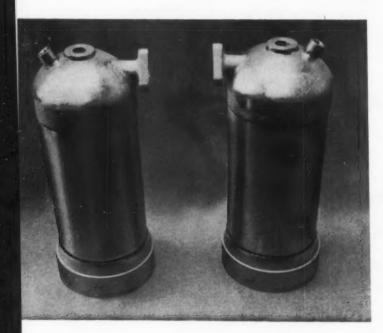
High-pressure tanks made of components joined by furnace brazing in a hydrogen atmosphere, using a copper-paste filler. The parts are tack-welded in position prior to brazing.
